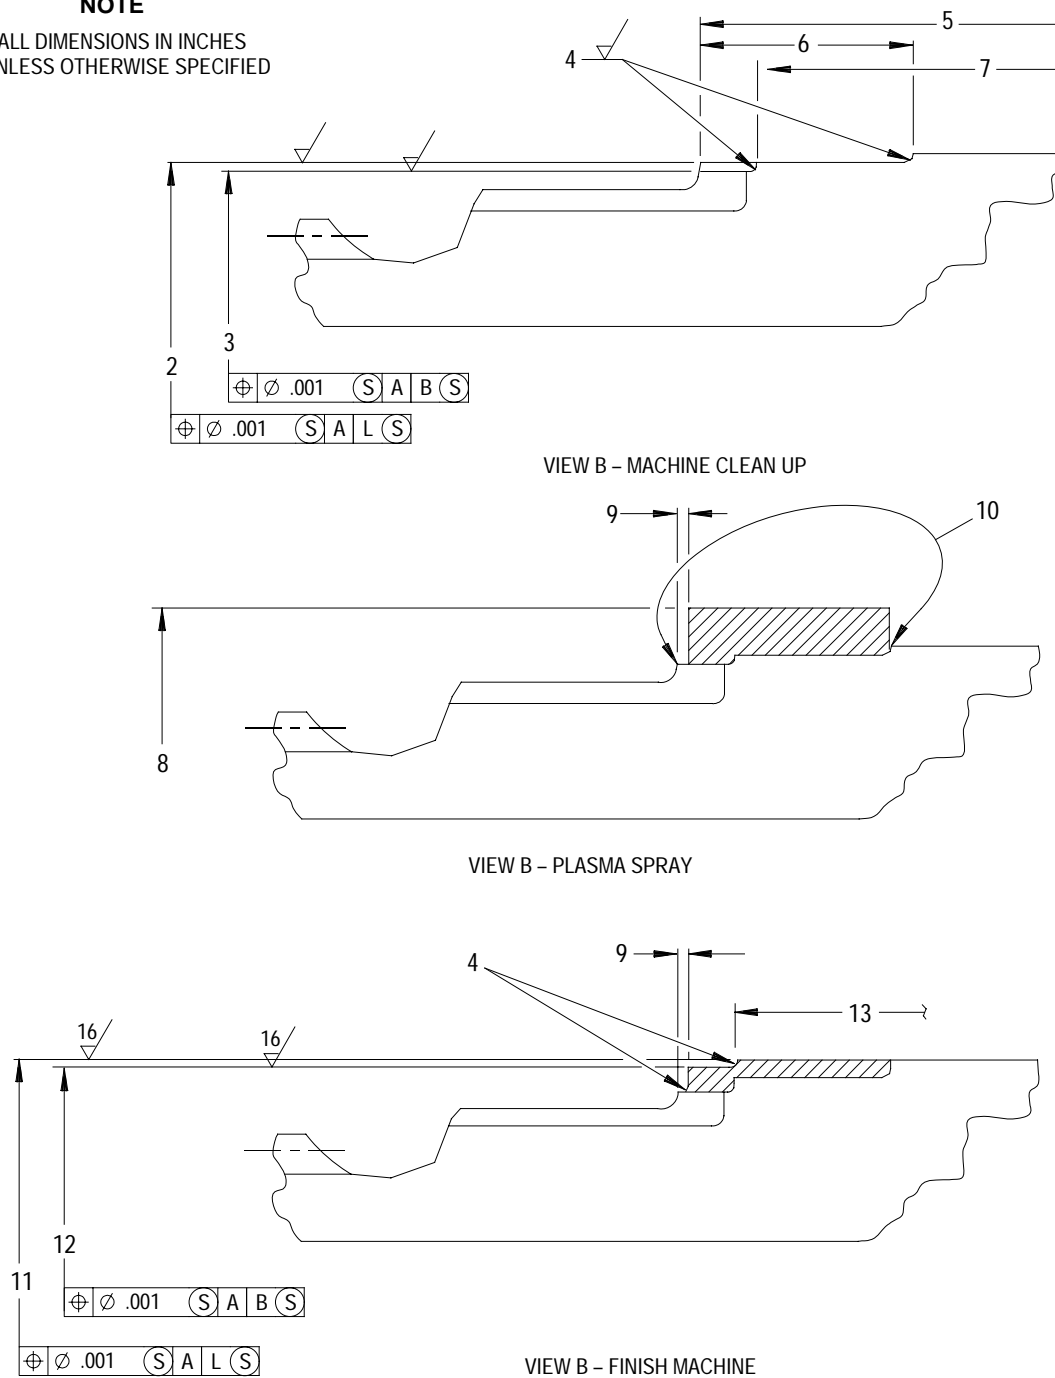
Sixth Stage Compressor Disk and Hub Assembly - Hardface Repair (Sheet 1 of 5)
